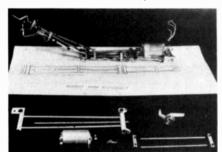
MANIPULATOR ASSEMBLY. Finished unit and separate pieces are facing opposite ways.
